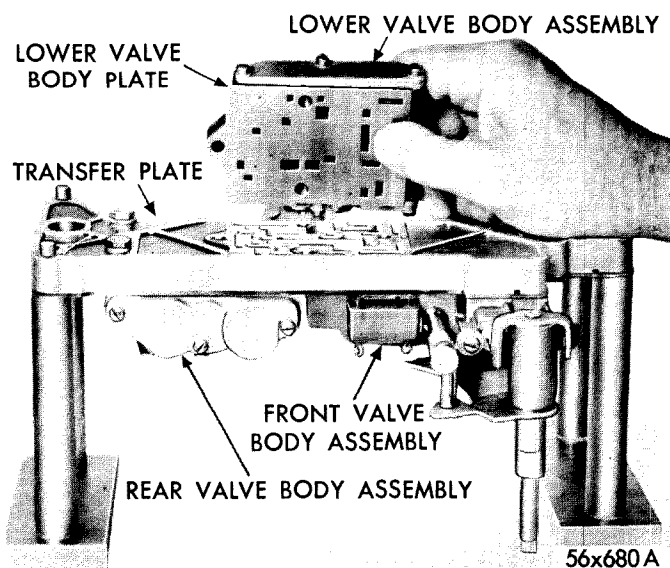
Removal and Installation of Lower Valve Body Assembly and Plate
